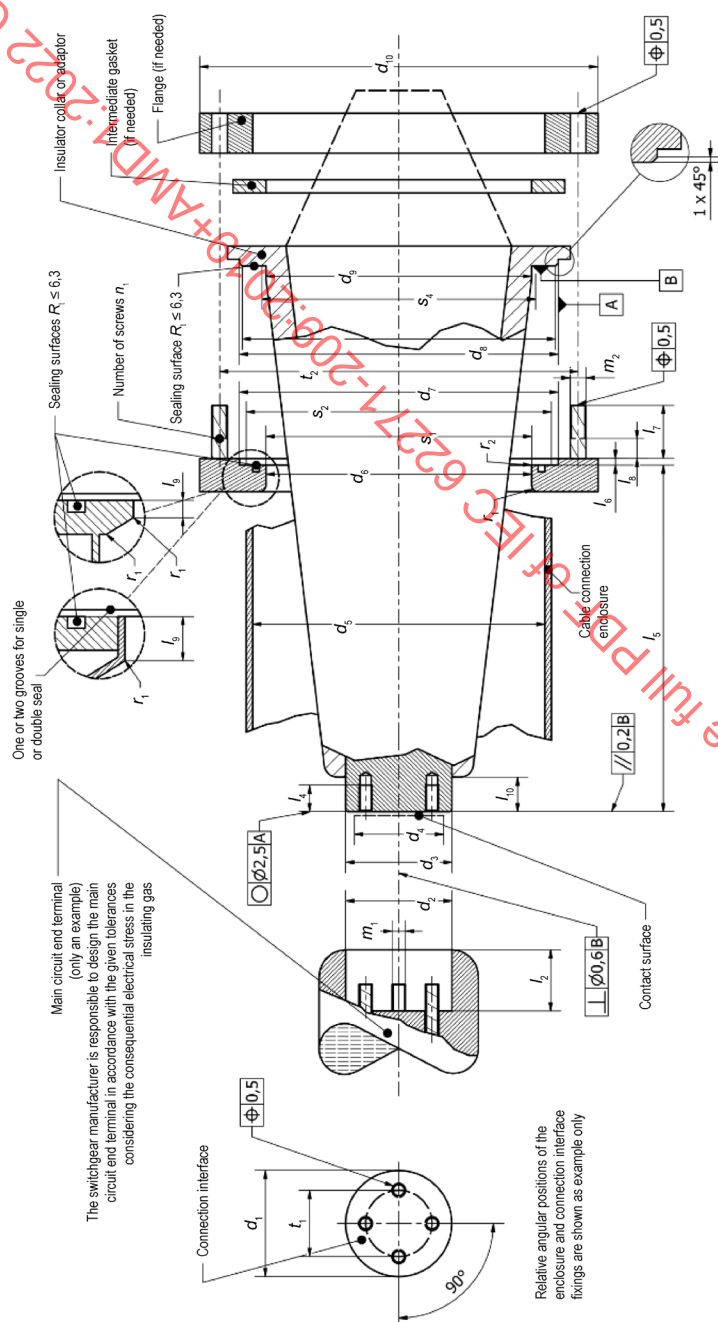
Dry-type cable connection assembly – Typical arrangement
